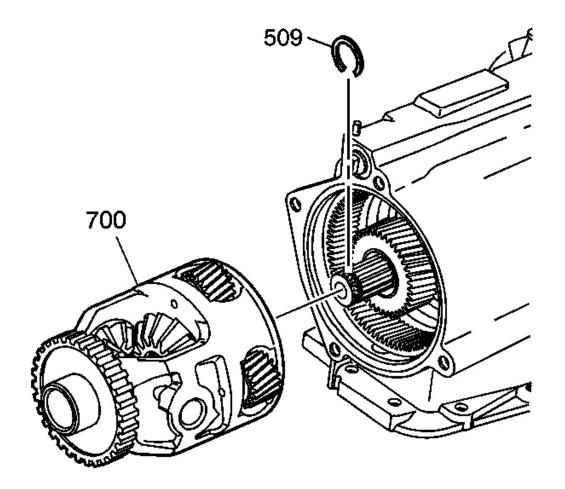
Identifying Output Shaft Differential Carrier & Compression Ring Courtesy of GENERAL MOTORS CORP.
